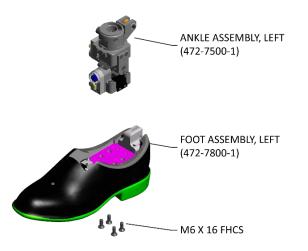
Ankle Assembly Attached to Foot Assembly with Four M6x16 FHCS
